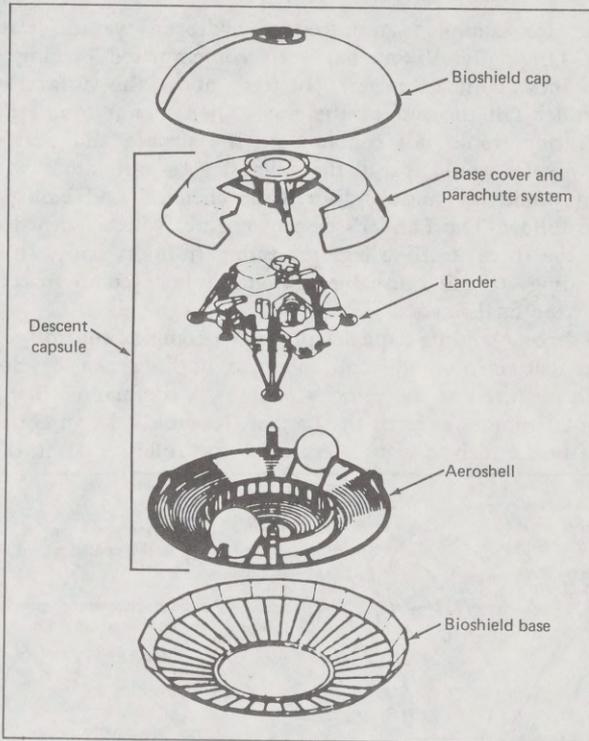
Exploded view of encapsulated Lander capsule.
